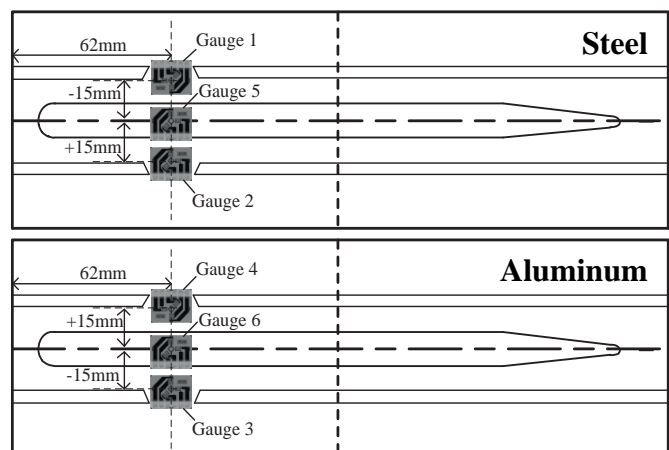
Strain-gauge positioning on Steel and Aluminium plates
